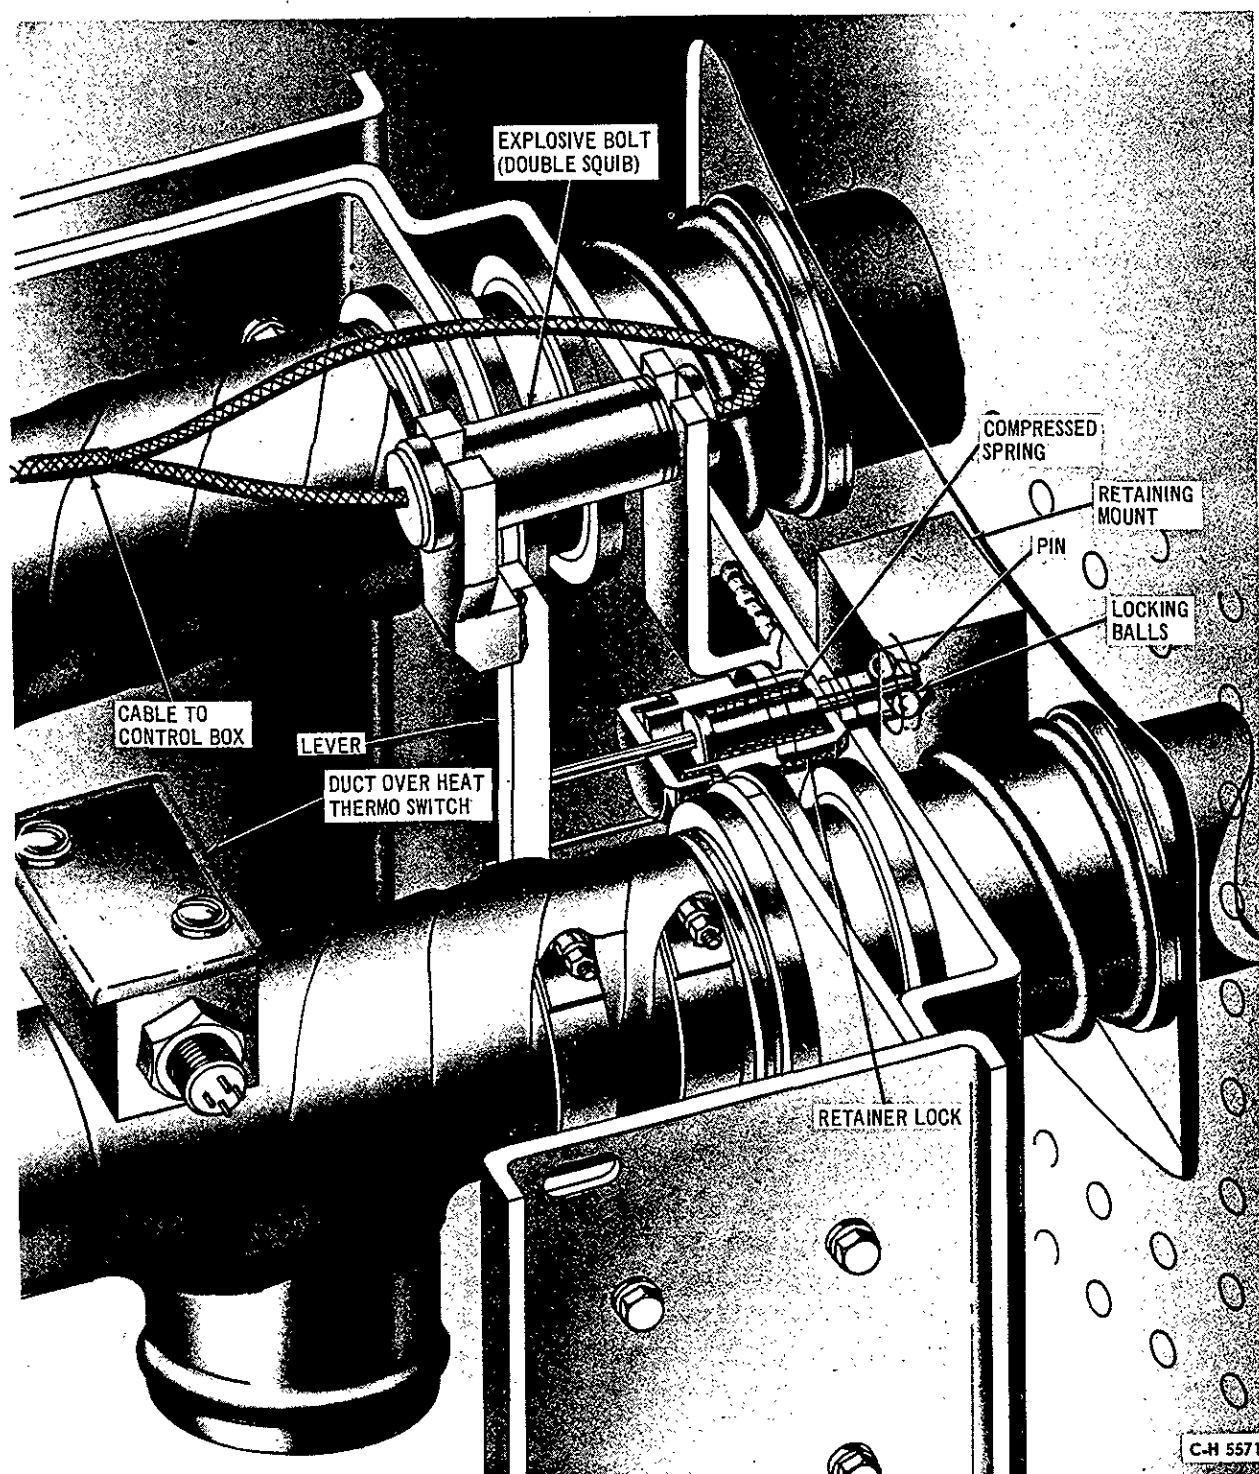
Quick-Release Mechanism Heater-Cooler Tank Assembly
